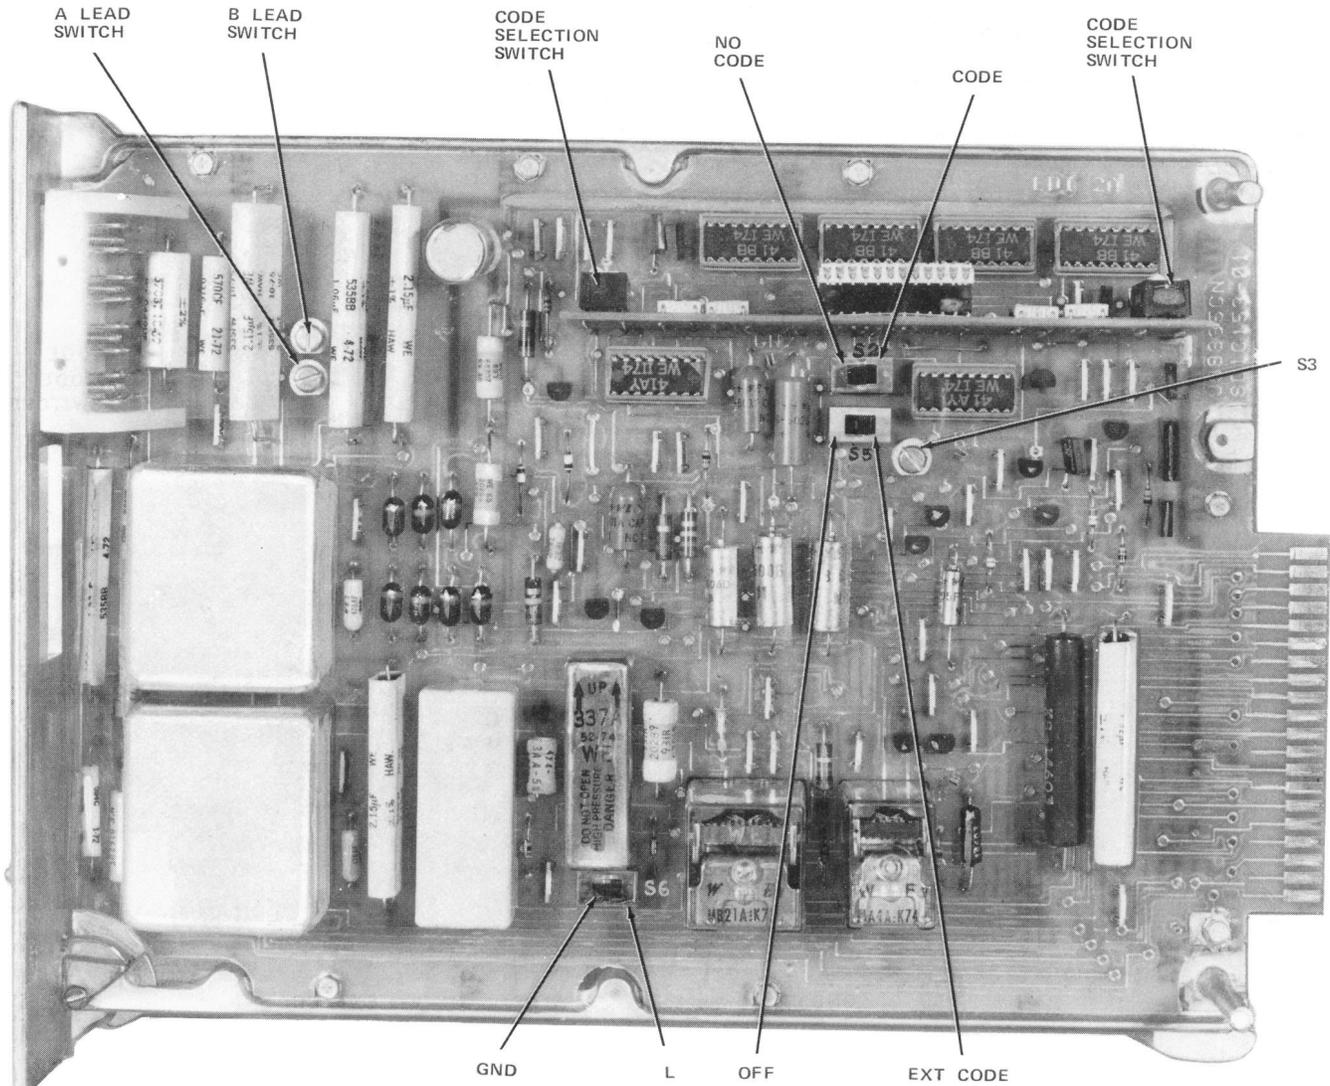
FGN PC Assembly Showing Coding and Impedance Matching Switches
